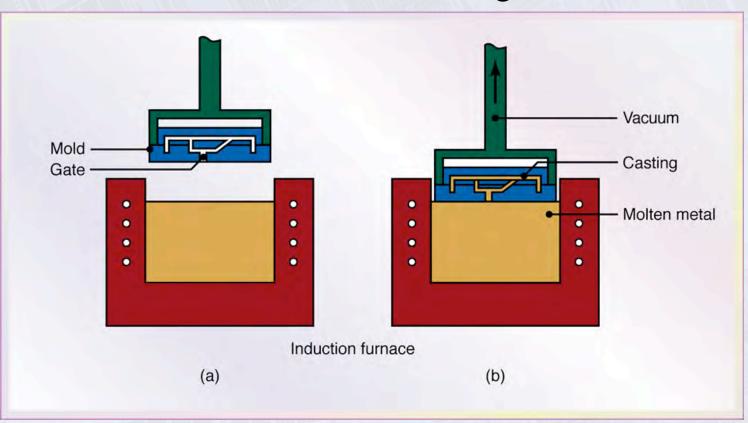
Schematic illustration of the vacuum-castin process. Note that the mold has a bottom gate. (a) Before and (b) after immersion of the mold into the molten metal. *Source*: After R. Blackburn.
